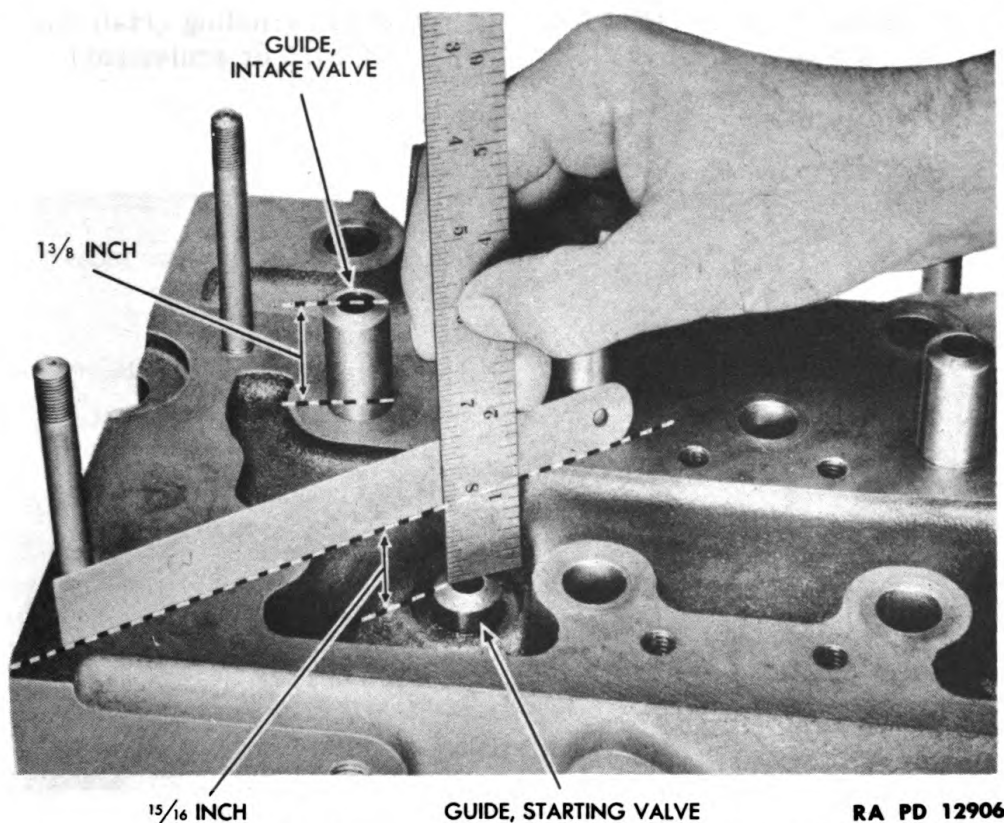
Measuring Position of Starting Valve Guide in Cylinder Head
